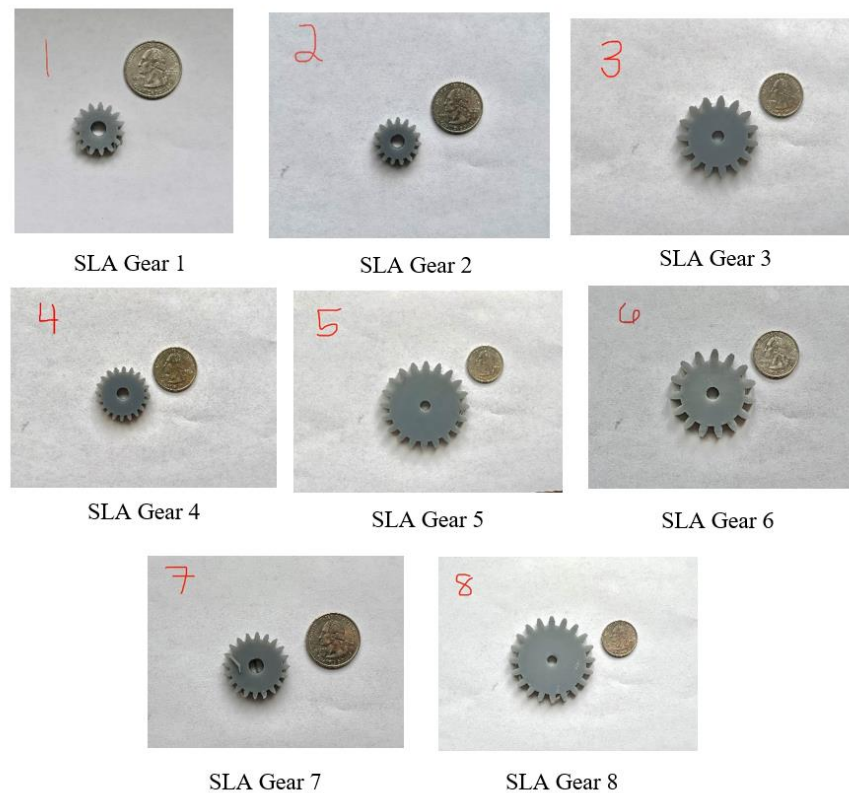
SLA Printed Spur Gears. A dime is placed to indicate the size.
